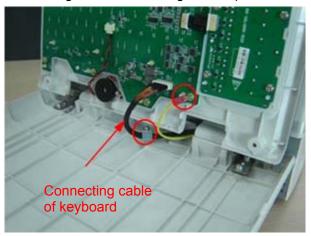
Disassembly of Top Cover Assembly of Keyboard (2)
